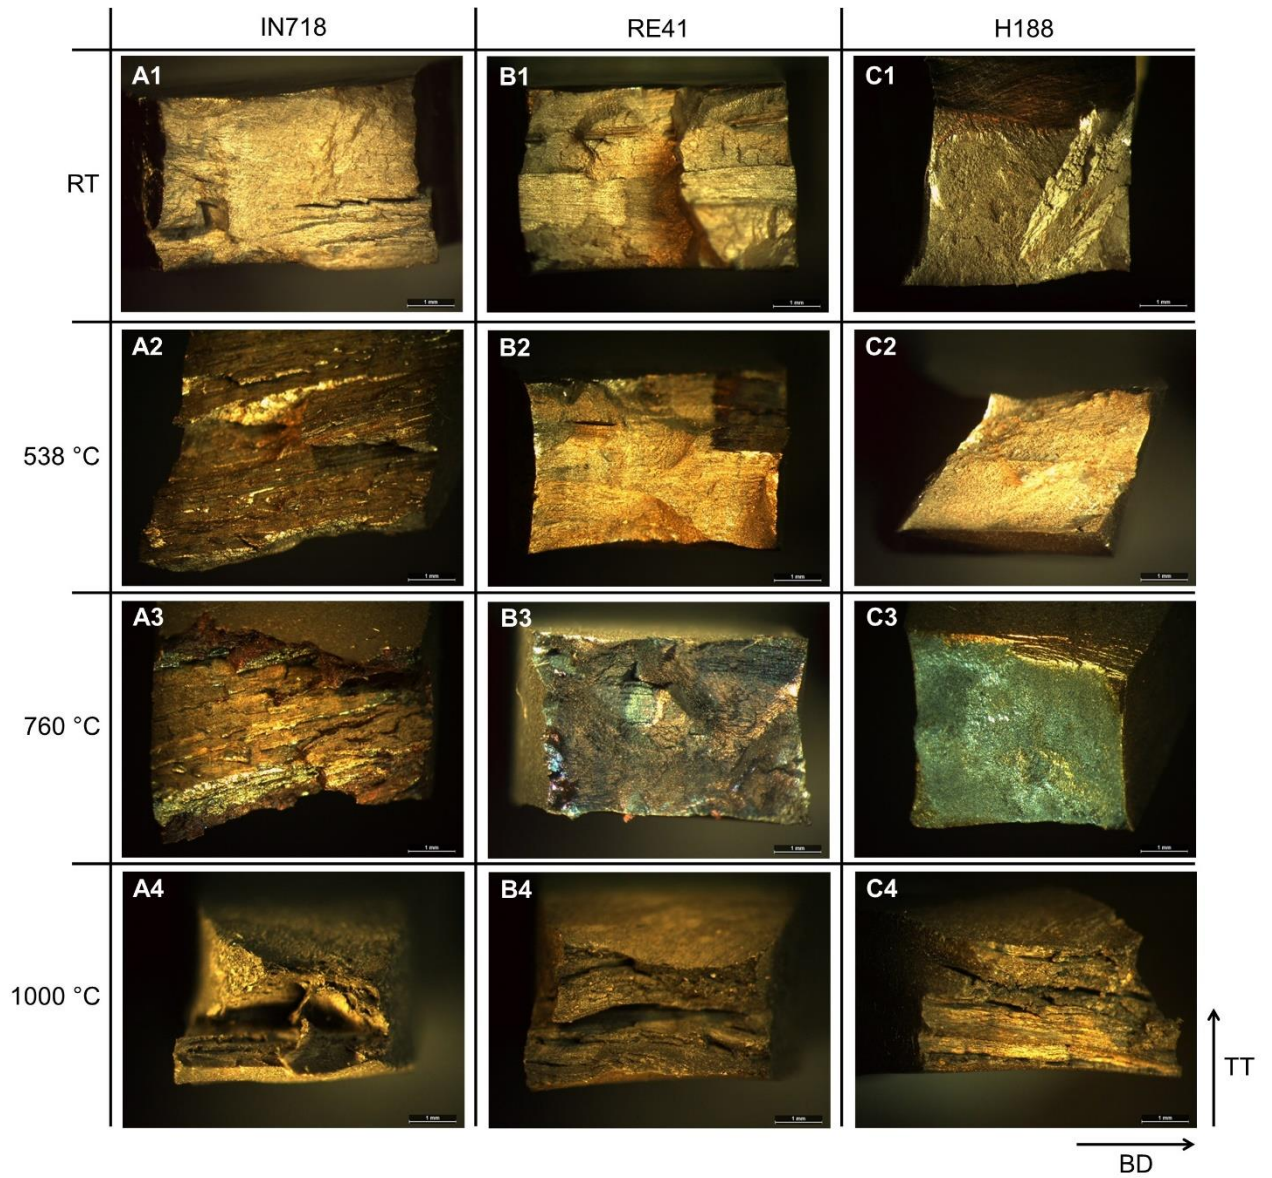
As-deposited macro fractographic images of fracture surfaces. (A) IN718, (B) RE41, (C) H188, (1) RT, (2) 538 °C, (3) 760 °C, (4) 1000 °C.
